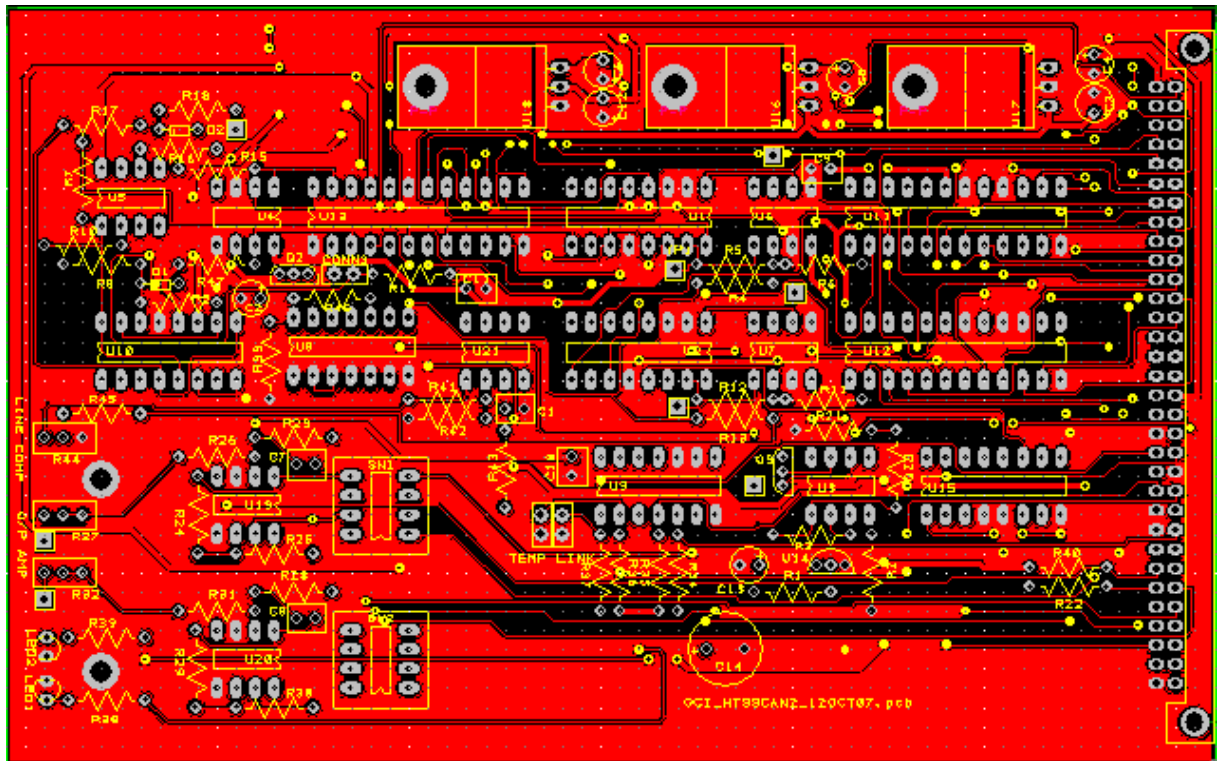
Double-sided printed circuit board layouts of the analogue board.
